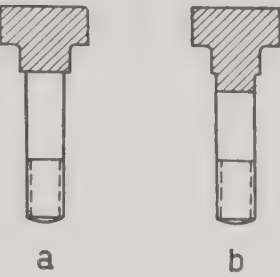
Composite for bond testing. Tensile specimens, with cross-section of white-metal (A) greater than, and (B) equal to, that of steel.
